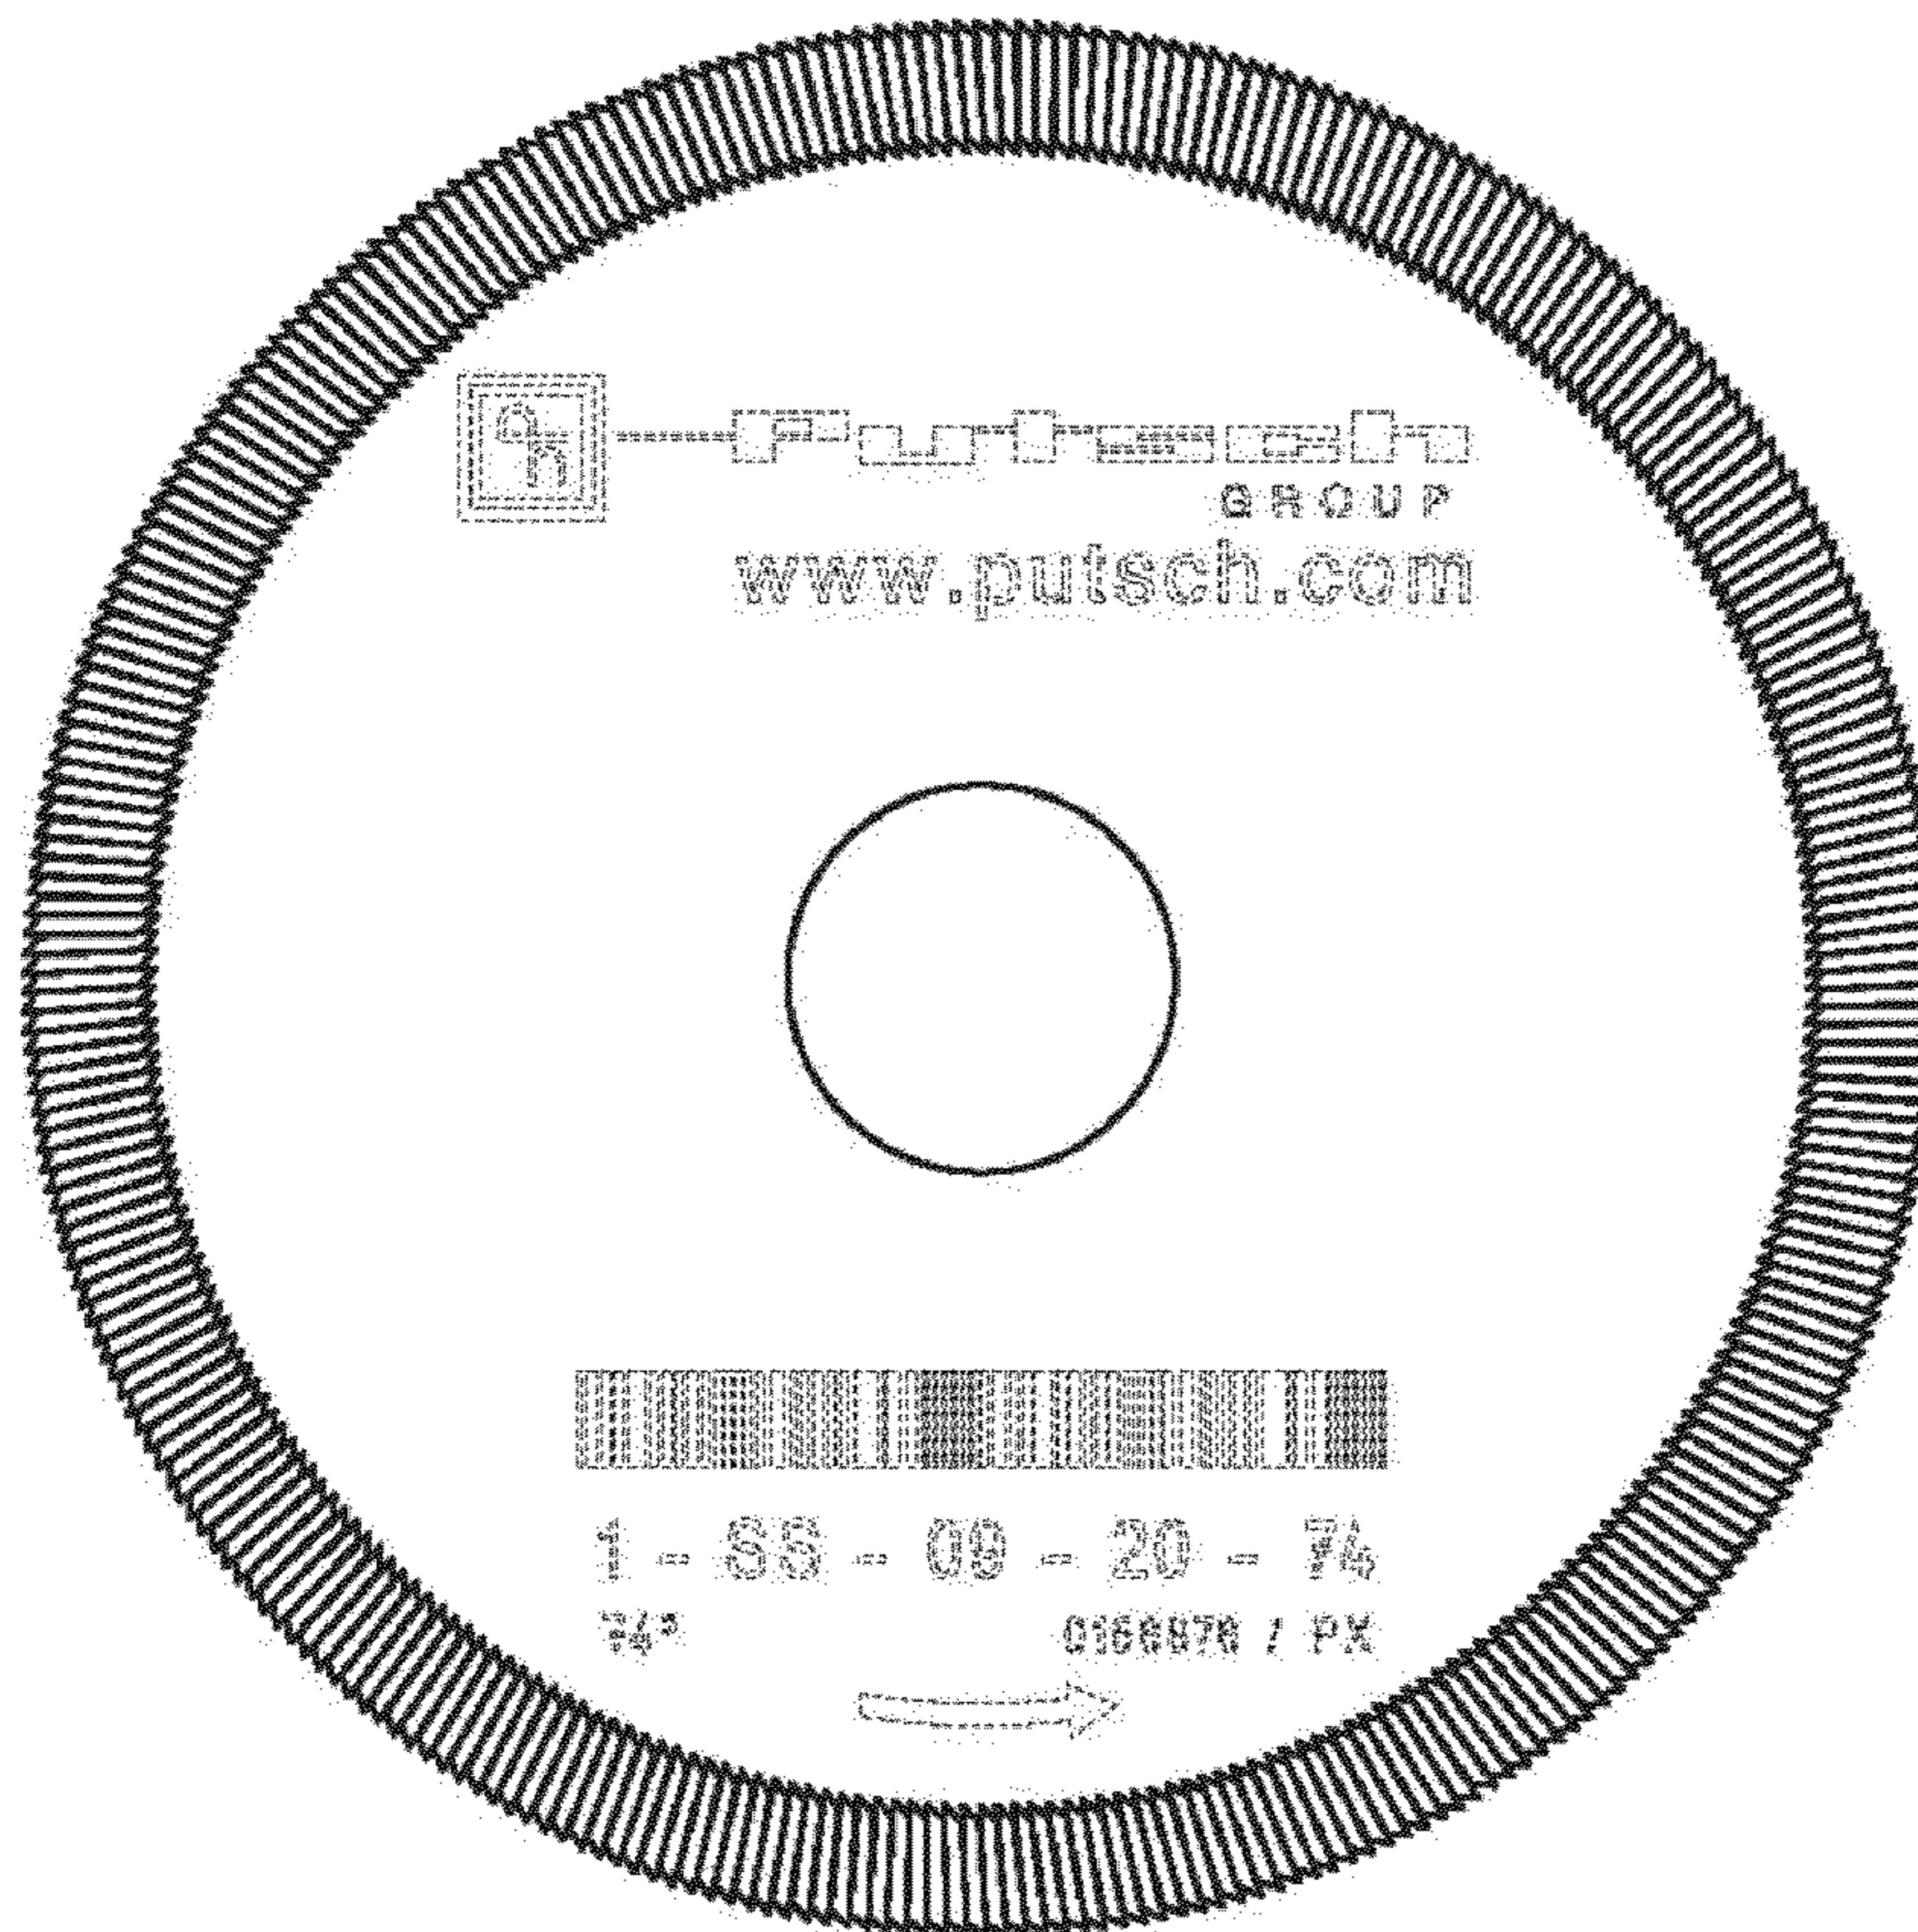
is a back elevational view of the milling tool of FIG. 1;
